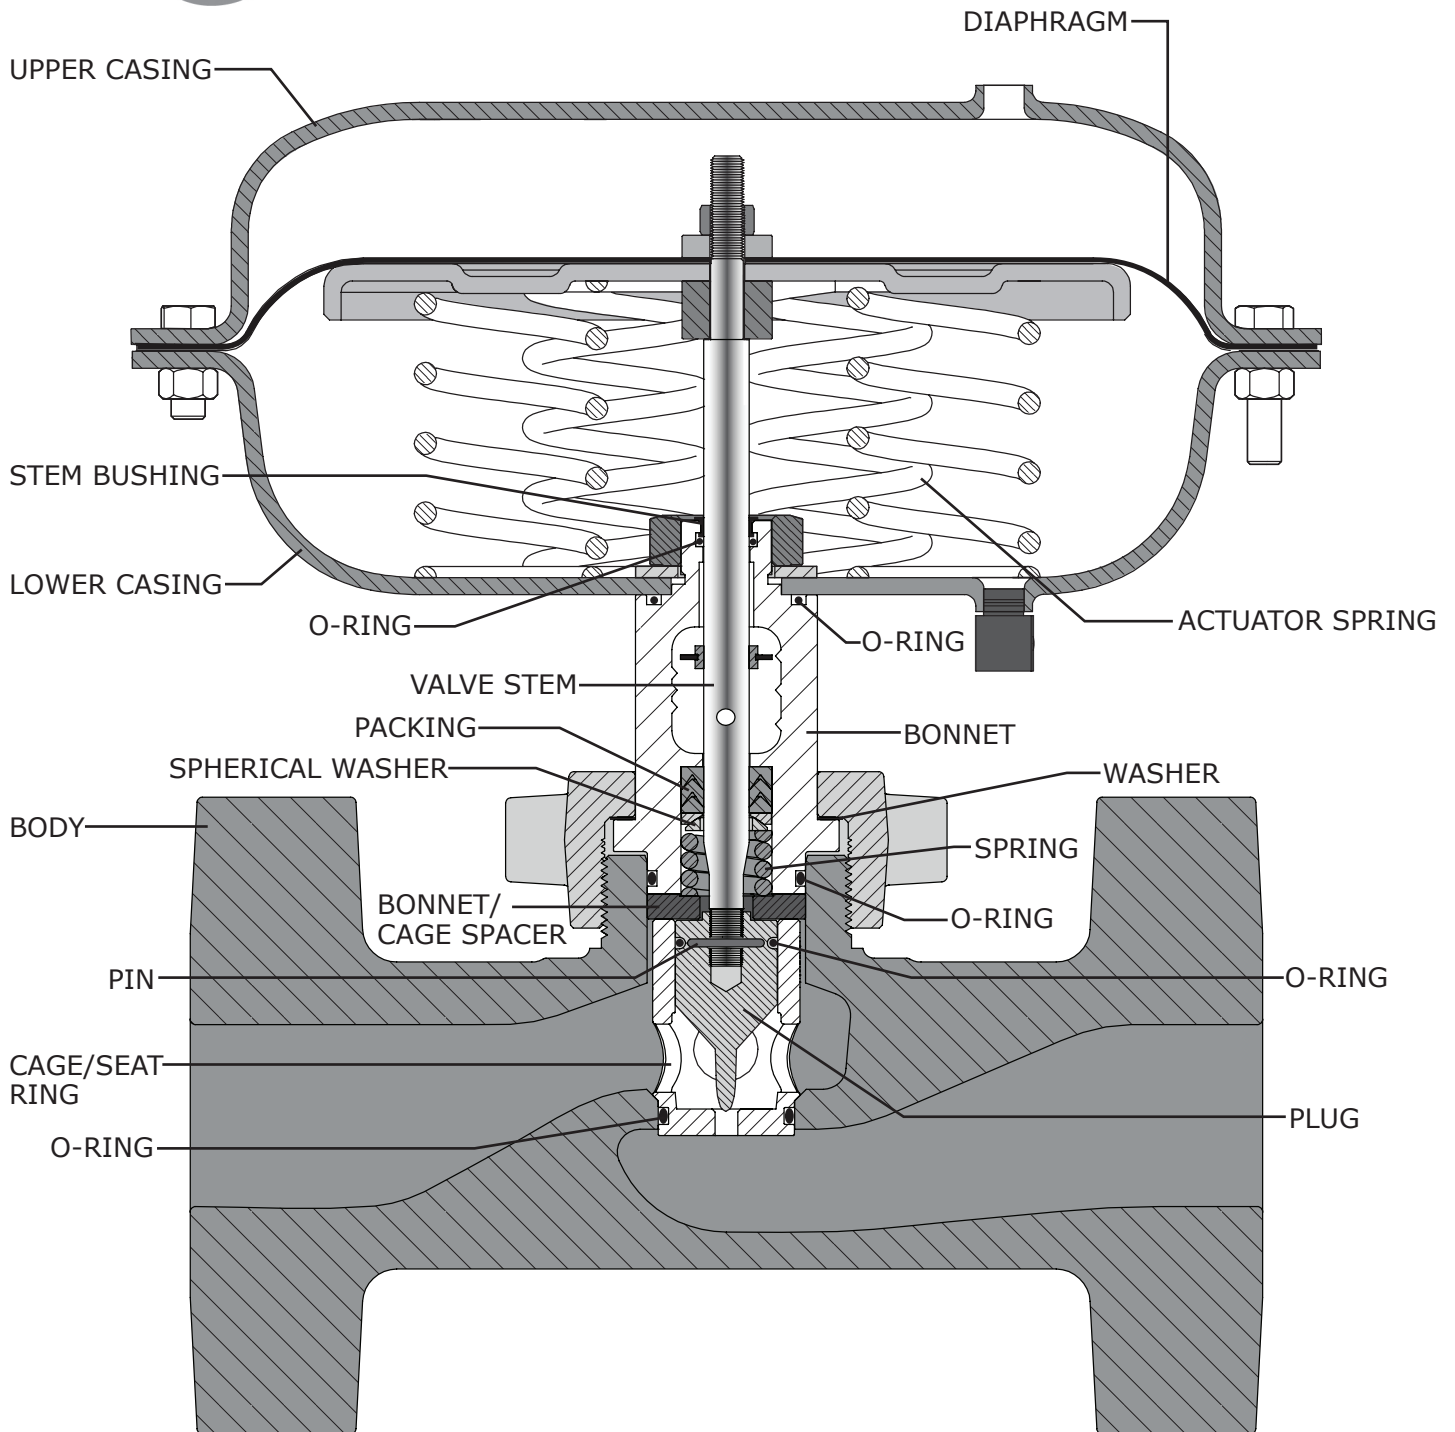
DF270 Fail Open 2 Inch Flanged Valve Cross Section (Standard 1 Piece Cage/Seat Ring Design)
